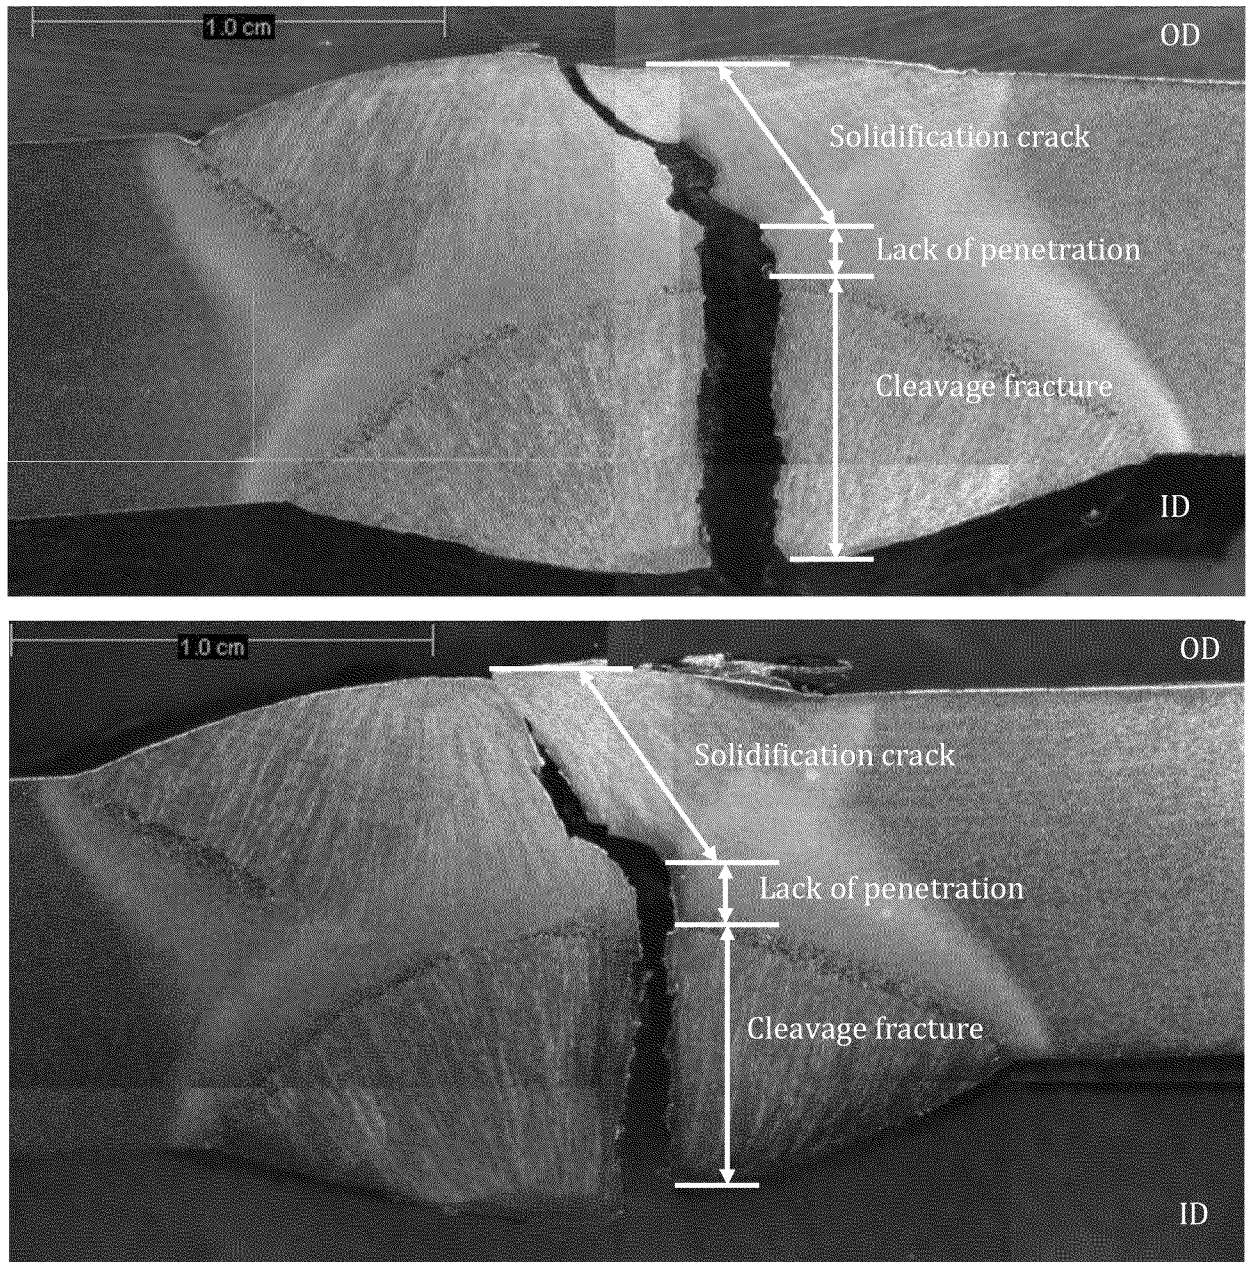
Stereomicroscopic montages of the rupture area metallographic specimens that show weld misalignment.
